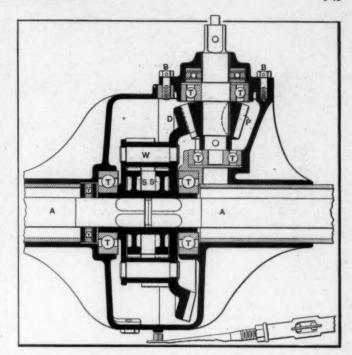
Showing the differential in sectional view. Note positions of ball bearing
